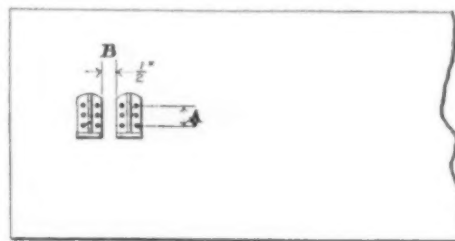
SPACING OF SUPPORTING LUGS IN PAIRS ON H.R.T. BOILERS
